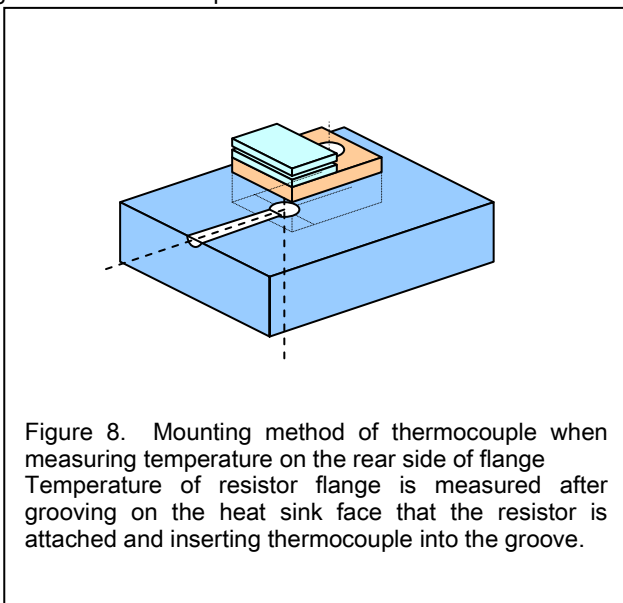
Mounting method of thermocouple when measuring temperature on the rear side of flange. Temperature of resistor flange is measured after grooving on the heat sink face that the resistor is attached and inserting thermocouple into the groove.
